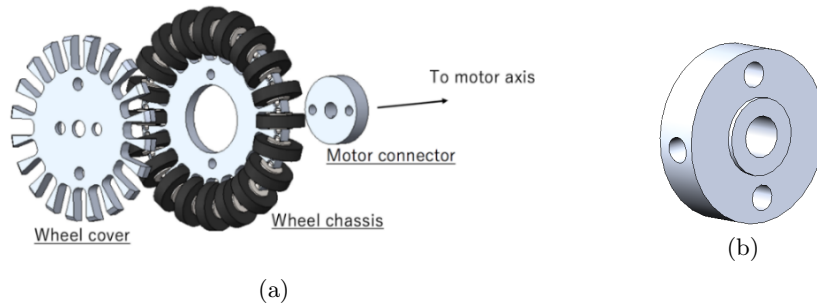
New wheel structure, (a)units, and (b)enlarged view of thinner (5mm) motor connector with screw hole on circle
